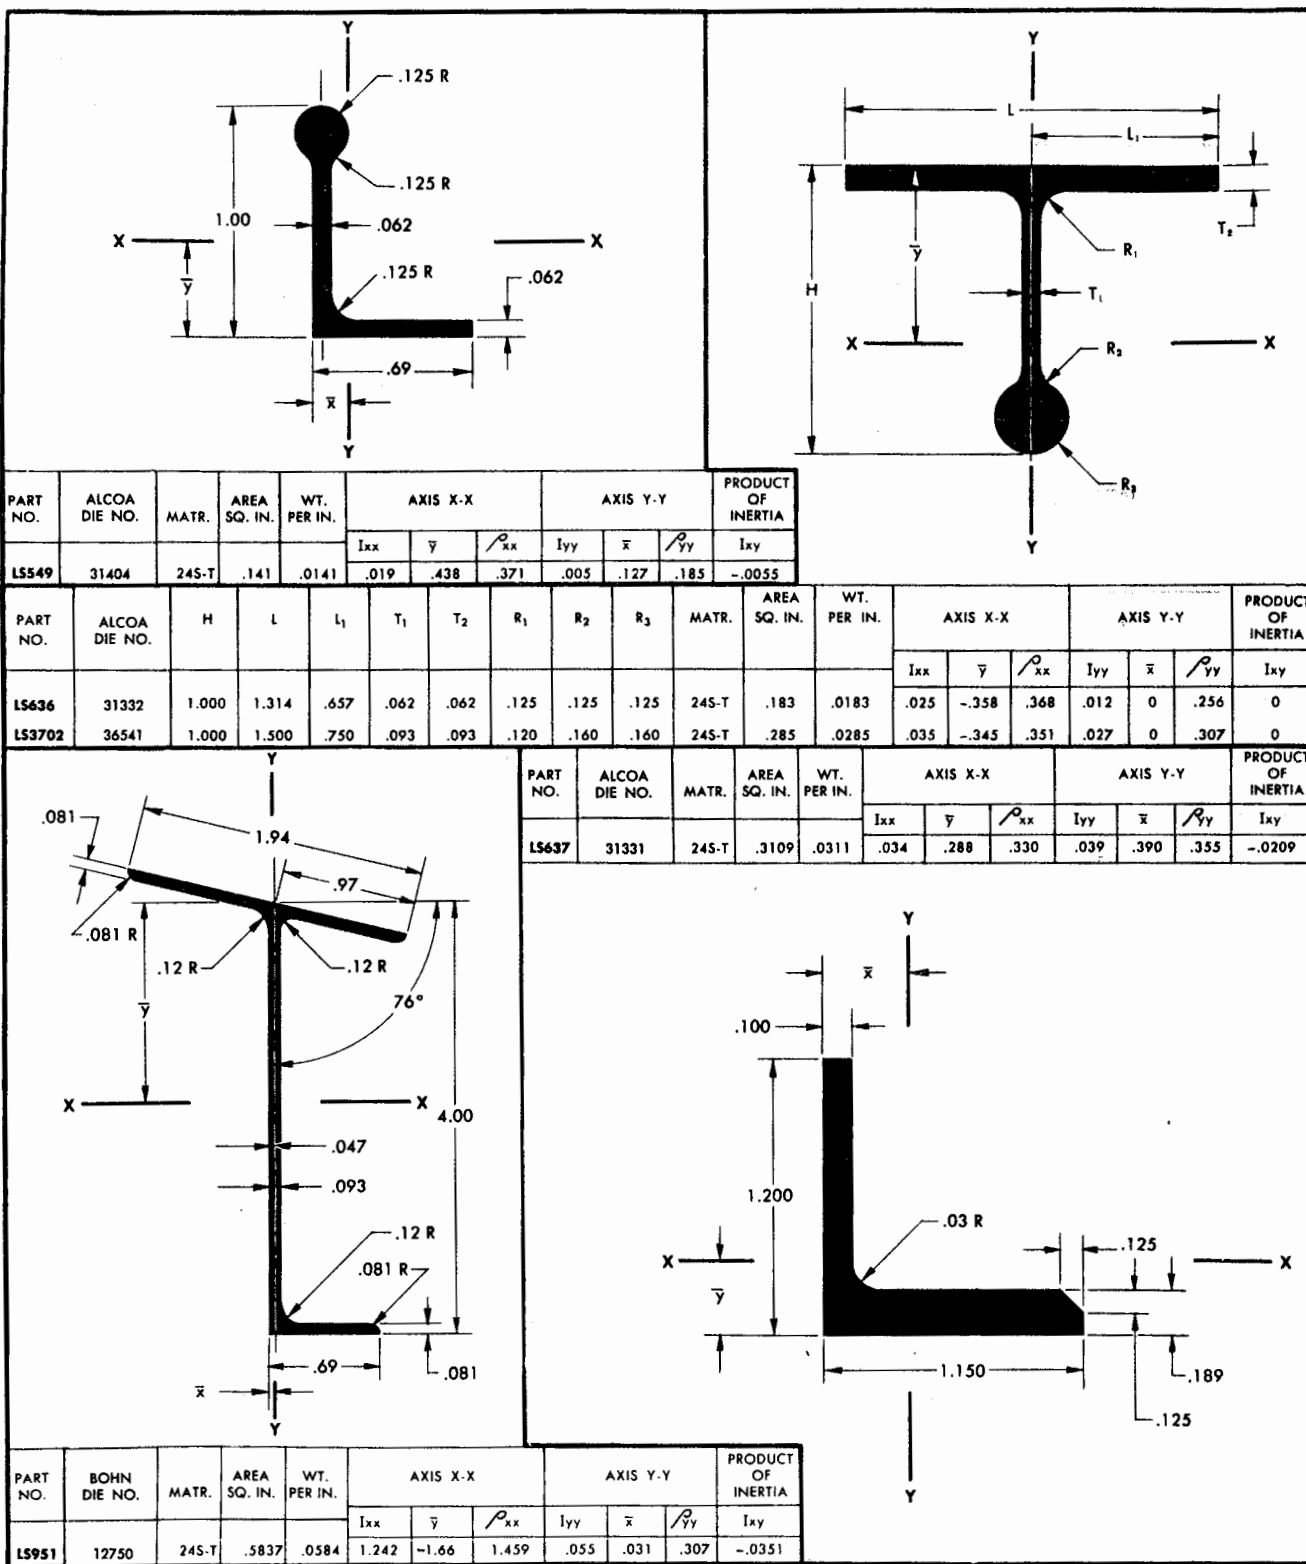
(Sheet 8 of 17 Sheets) — Extruded Standards
